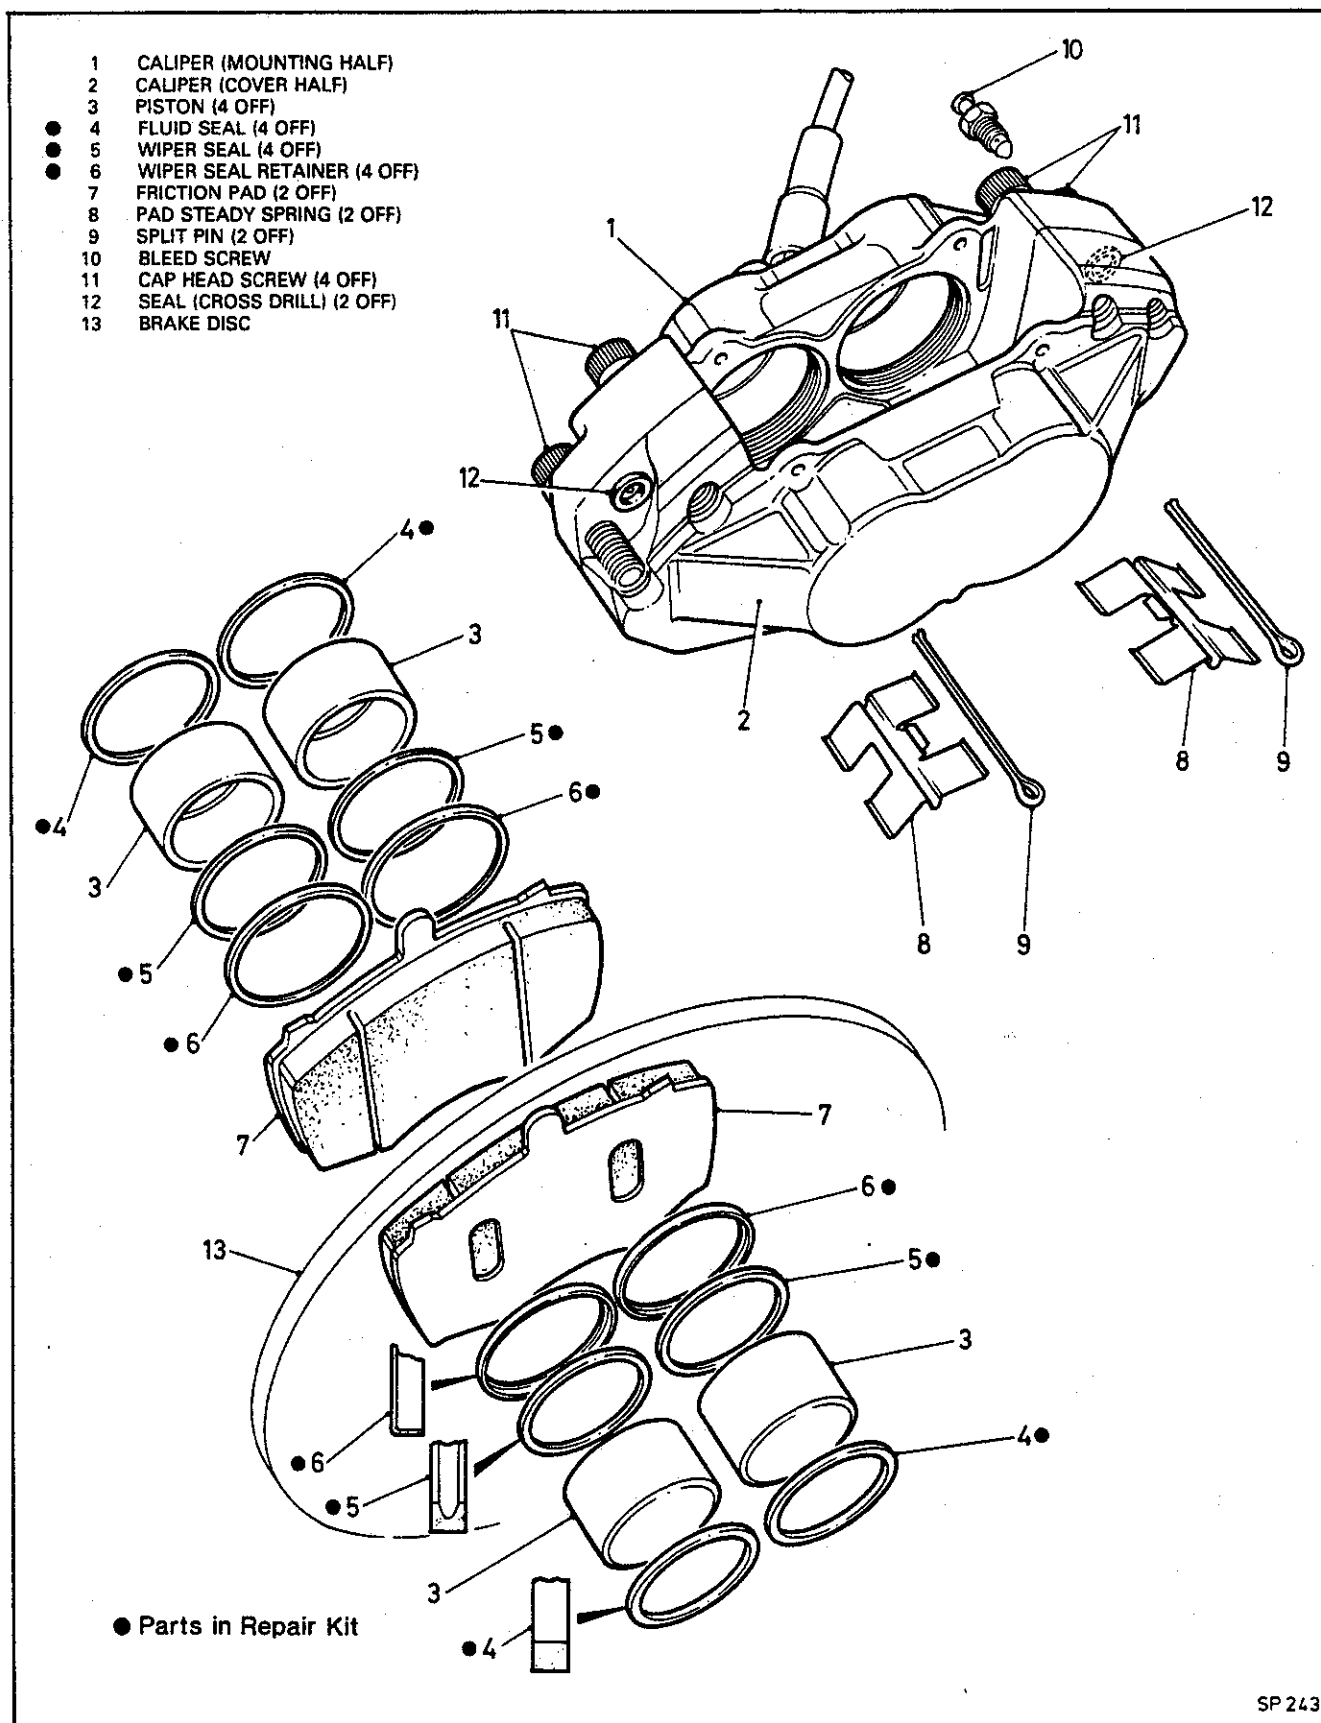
Exploded view of 4 x 46M caliper assembly.
